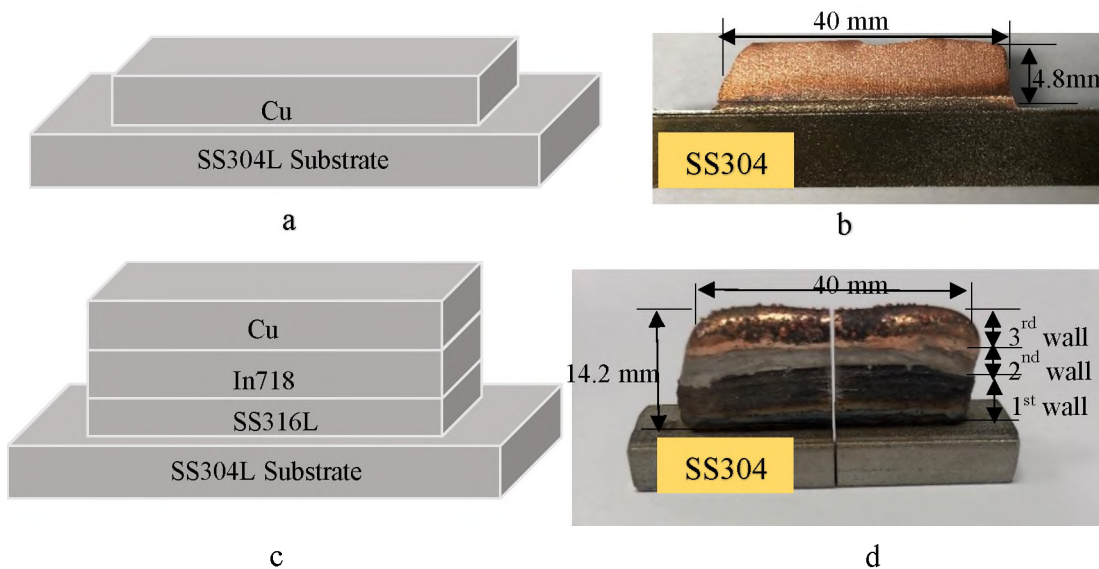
(a) Schematic of direct joining specimen; (b) Photograph of direct joining specimen after cutting; (c) Schematic of gradient alloy specimen; (d) Photograph of gradient alloy specimen after cutting.
